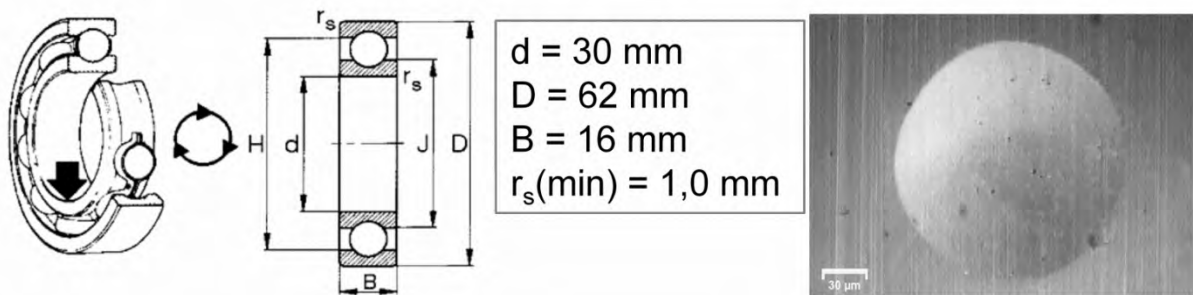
Deep Groove Ball Bearing type 6206; right: indentation in raceway of predamaged bearing (SEM-micrograph)
